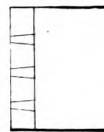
Showing Details Fastening Sides and Back of Cabinet.
